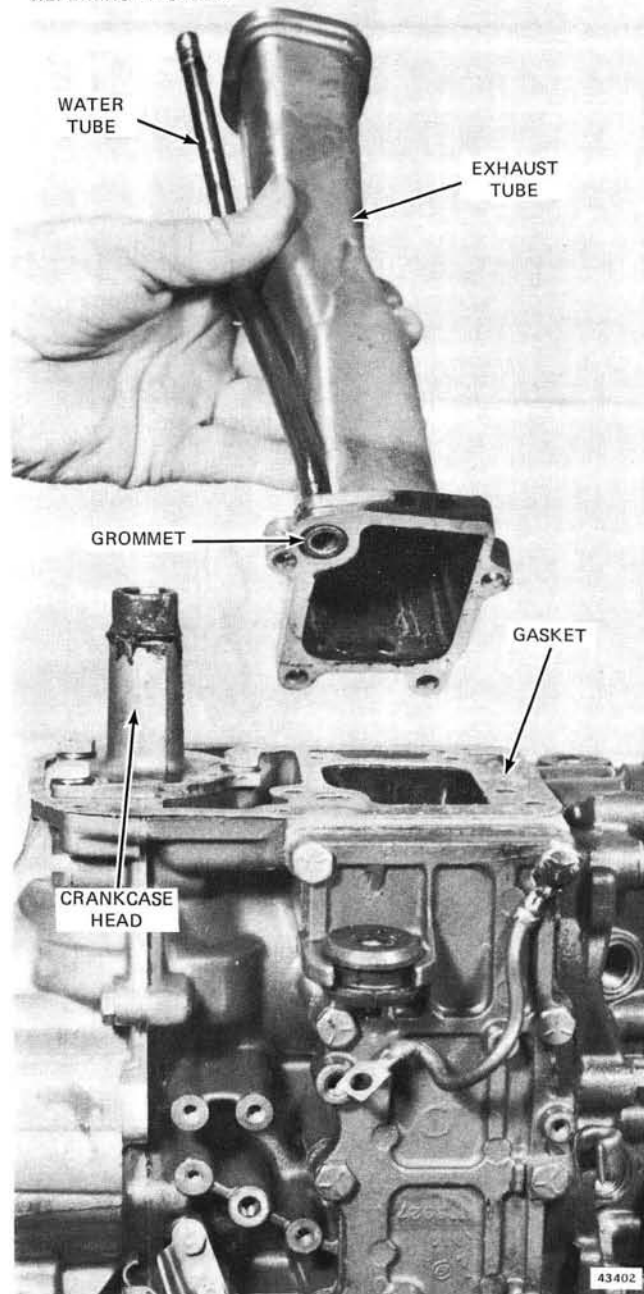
Removing Exhaust Tube and Water Tube Assembly
